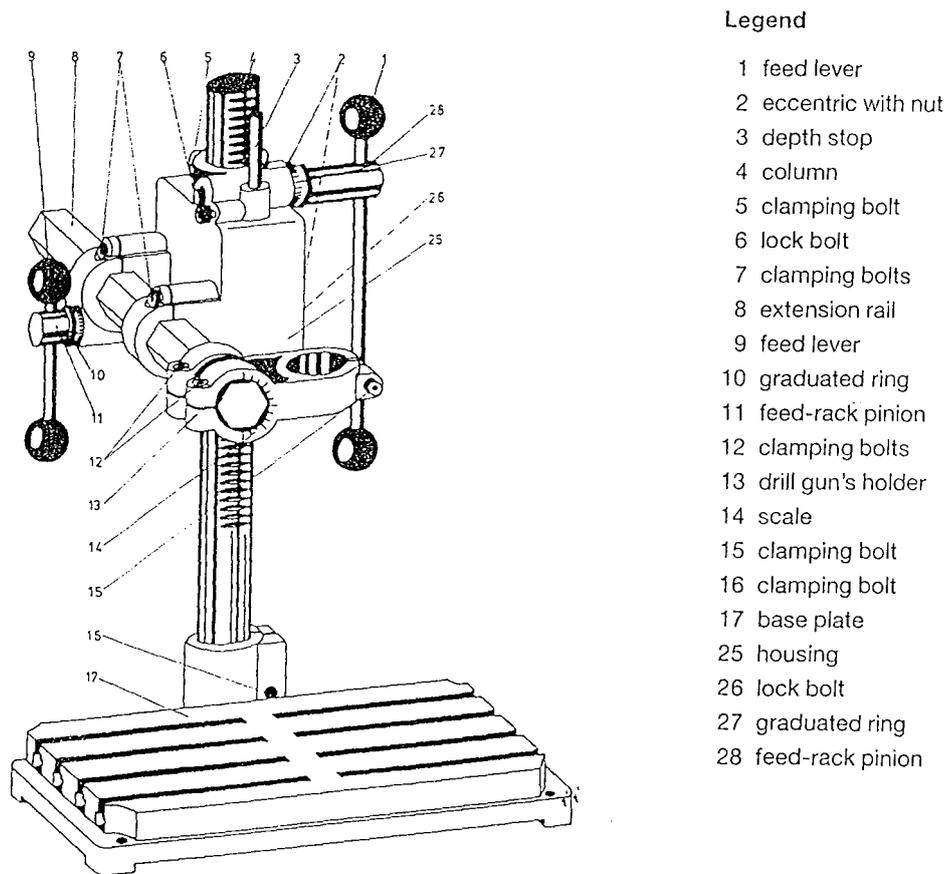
A stand fixes the lamp relative to the package. The lamp is fastened on a cross table mounted on the base plate No. 17 and the carrier of the package on the extension rail No. 8.
